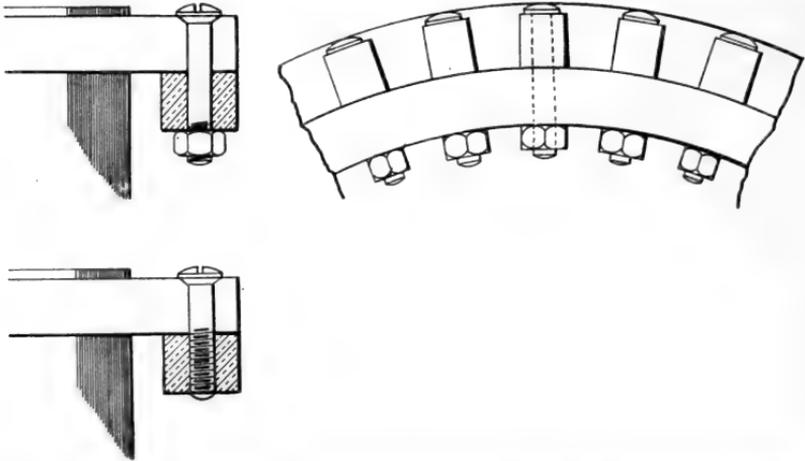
Typical methods of fastening end Rings to rectangular Rotor Bars.
